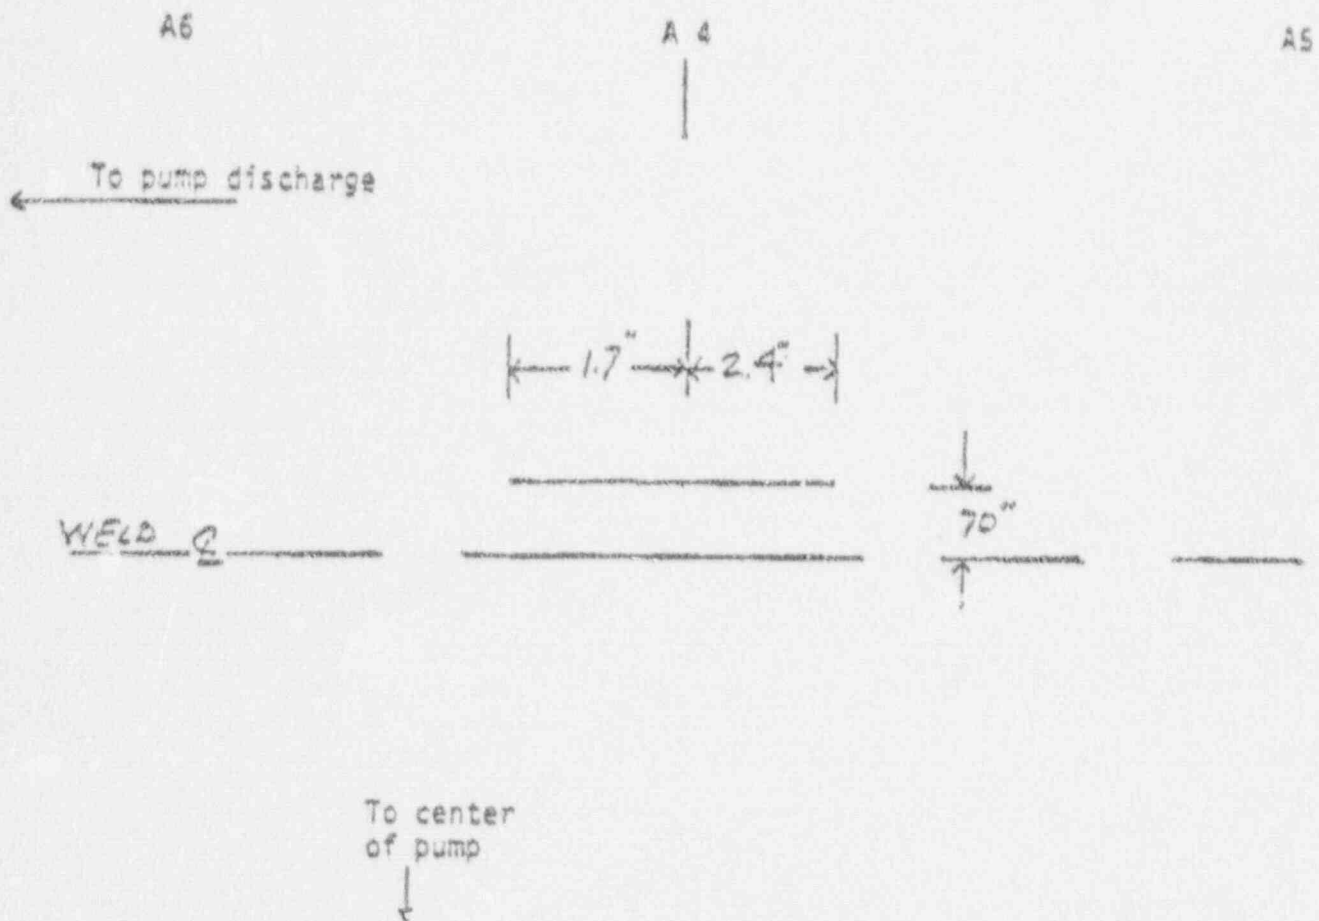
ANO-1 1988 UT Exam of "B" RCP Lower Scroll Weld Indication Plan View
